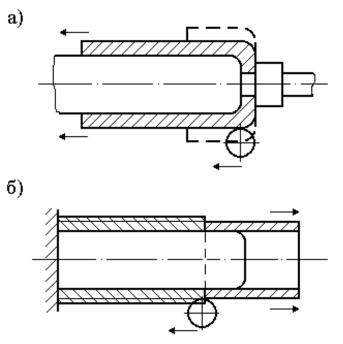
Rotary drawing of a cylindrical thin-walled part by direct (a) and reverse (b) methods
